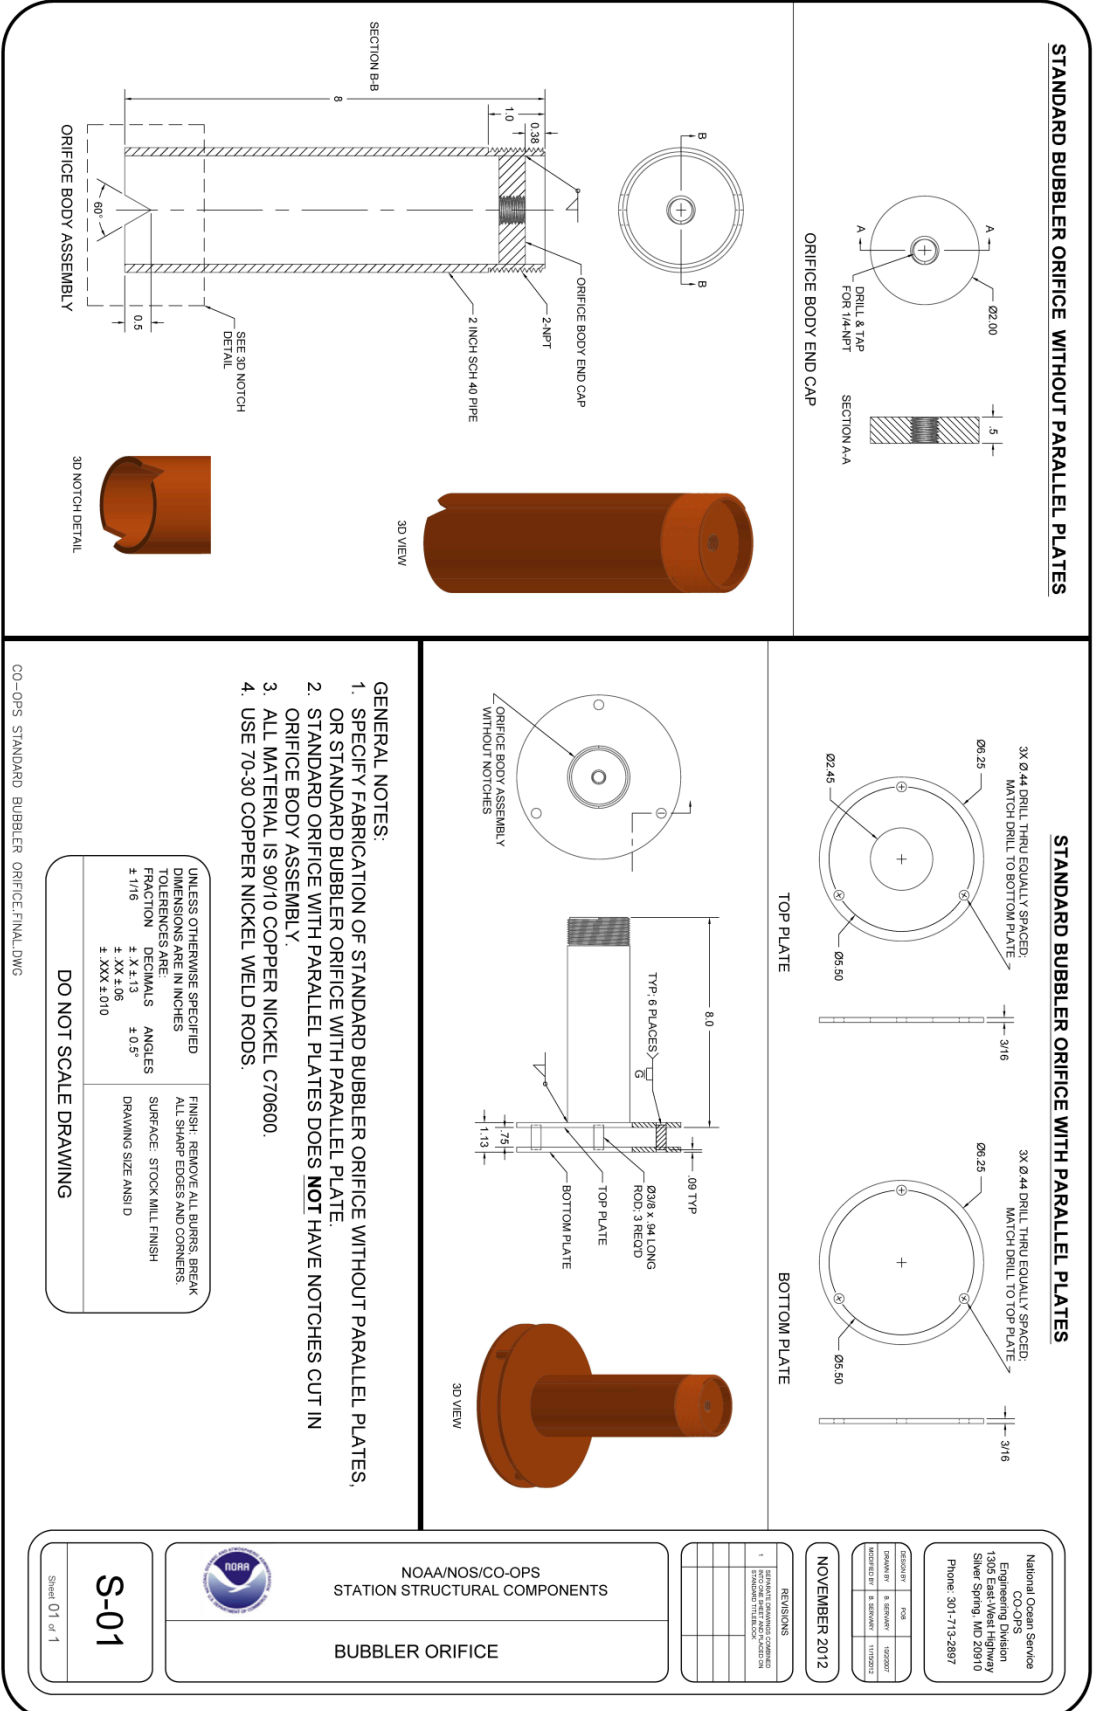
Bubbler Orifice and Parallel Plate Assembly
